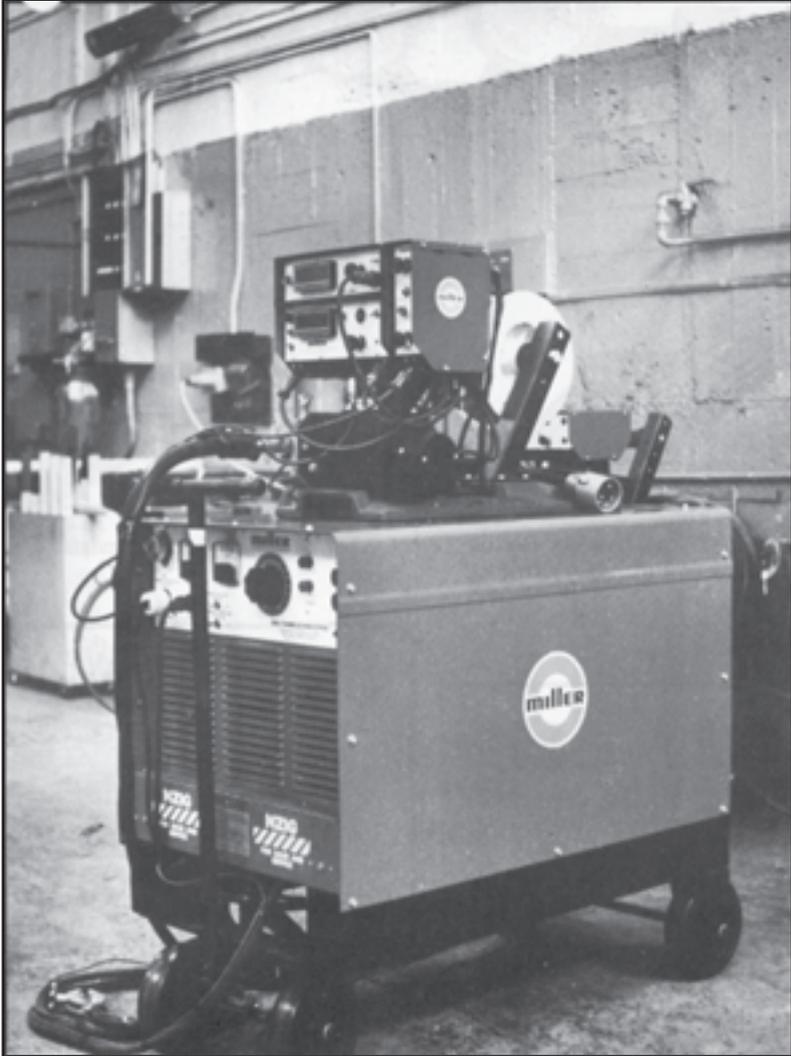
A MIG (Metal Inert Gas) welding plant. The gas cylinder is not shown, but stands behind the wire feed unit. The complexity of the unit can be seen, and it is suitable for use only by experienced workers.
